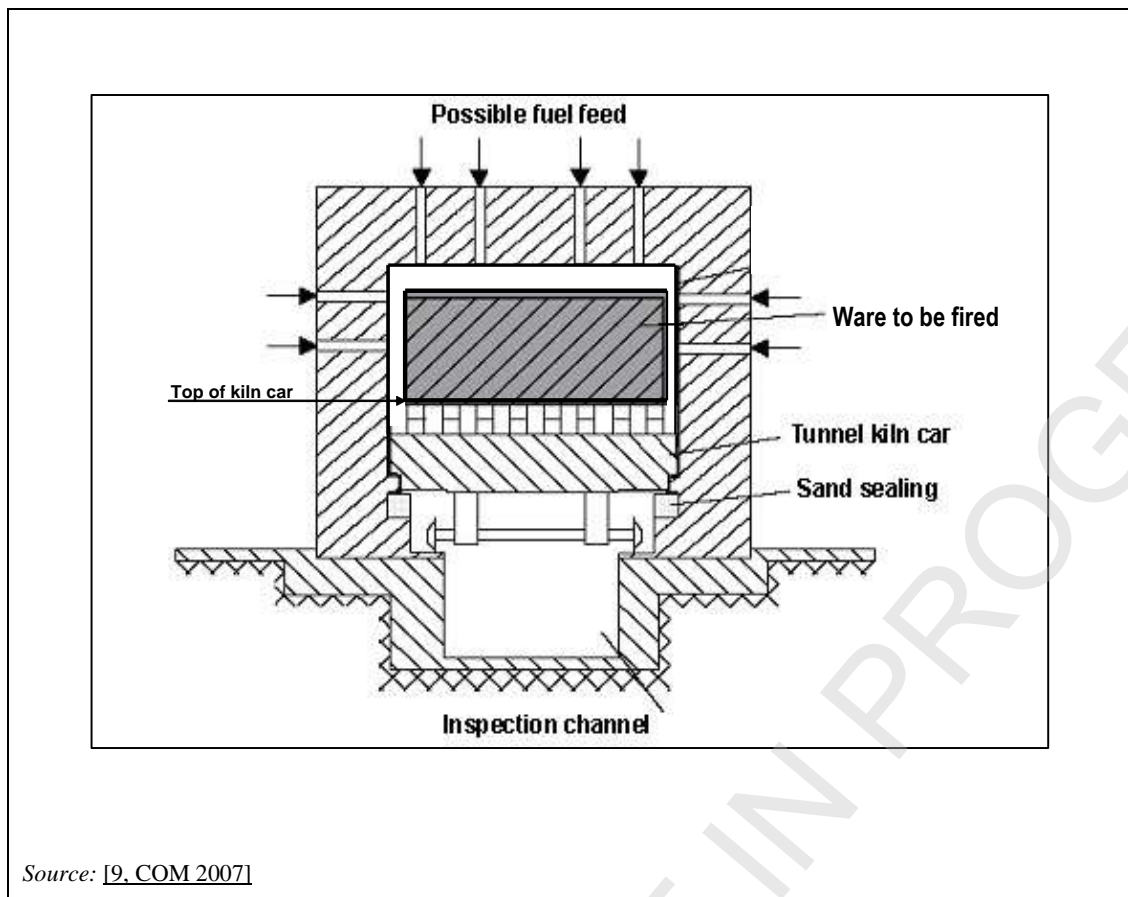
Cross-section of a tunnel kiln with a tunnel kiln car
